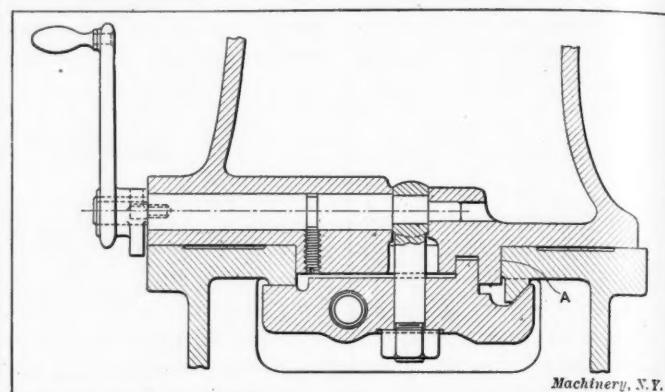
Eccentric Action Clamping Device used on Chucking Lathe
